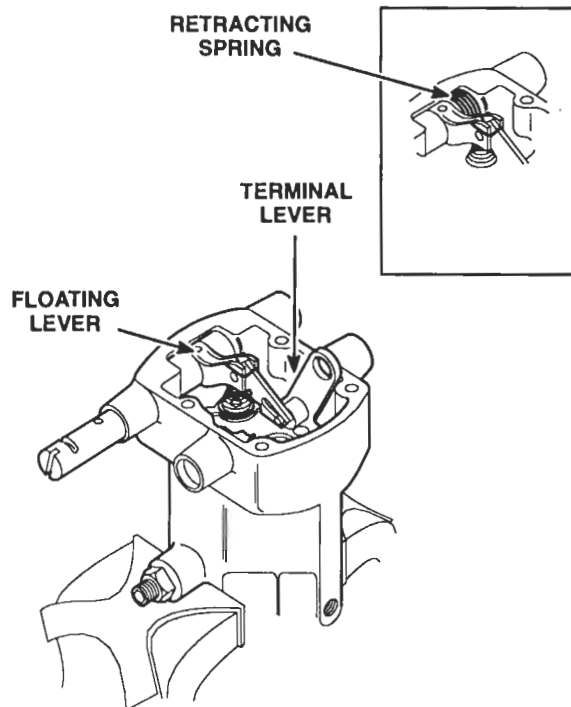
Installing Speed Adjusting Lever, Floating Lever, Speeder Spring and Pilot Valve Plunger Assembly
